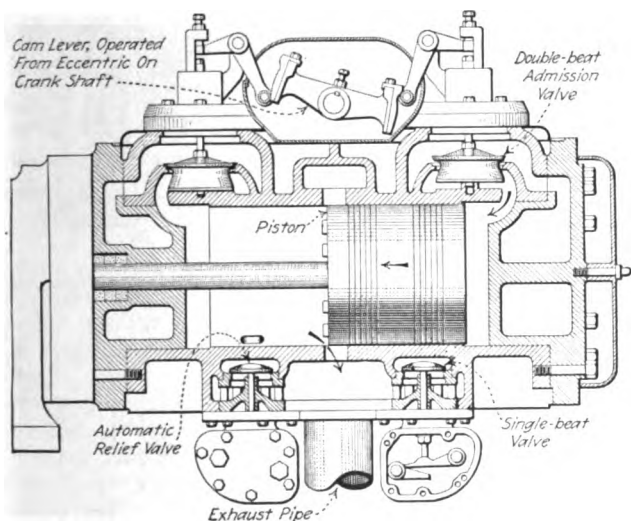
Longitudinal section through cylinder of Skinner "Universal Una-flow" engine, showing valve-operating mechanisms.
